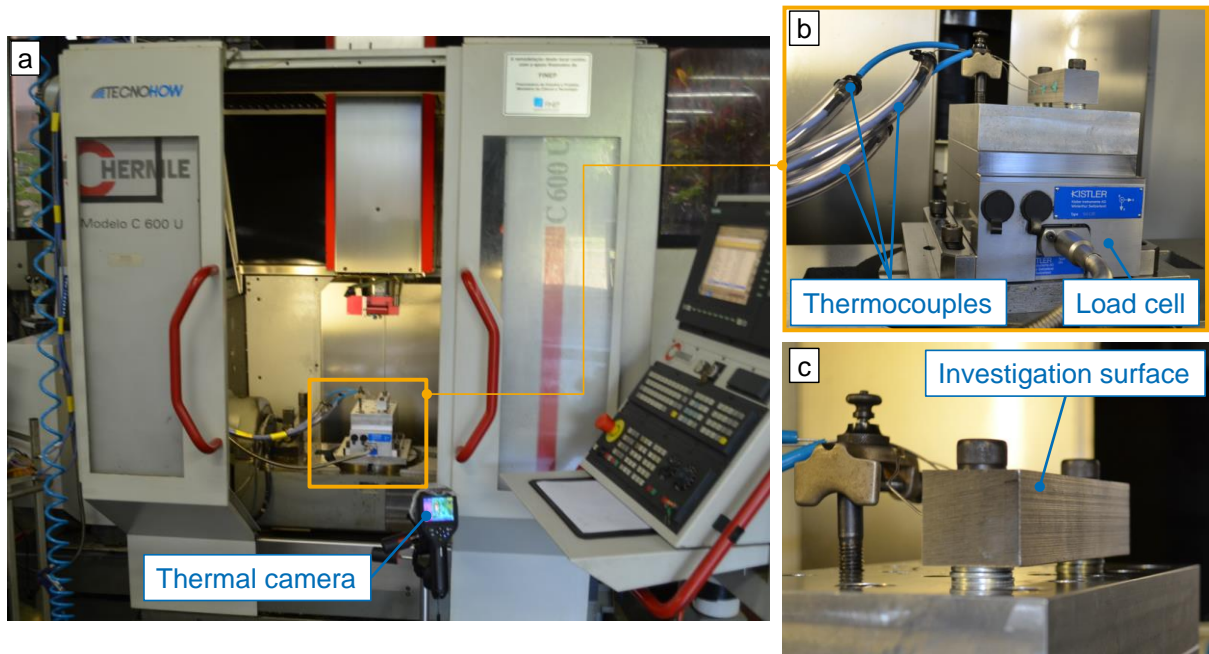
Production of the machined samples: *Hermle C600 U* equipped with *Kistler* dynamometer thermocouples and assisted with a thermal camera; (b) Instrumentation detail; (c) Specimen's face to be machined.
